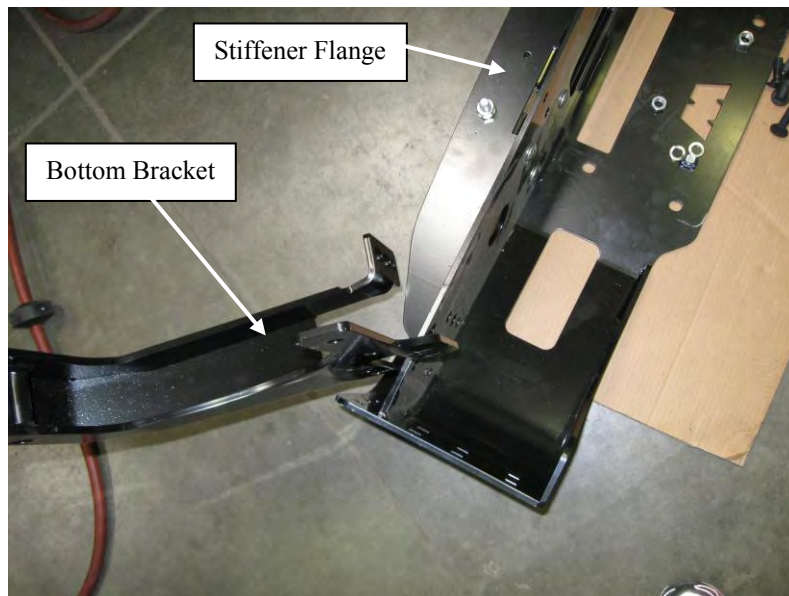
Large Frame Carrier: Install Bottom Bracket at an angle to get around Stiffener Flange.
